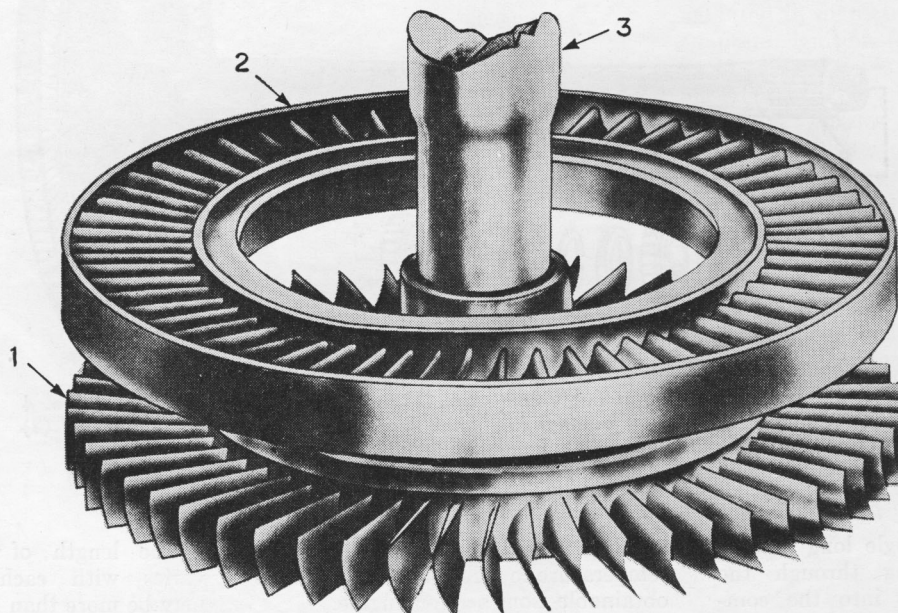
The GE I-16 single-stage turbine includes (1) turbine wheel; (2) nozzle diaphragm; (3) shaft.
